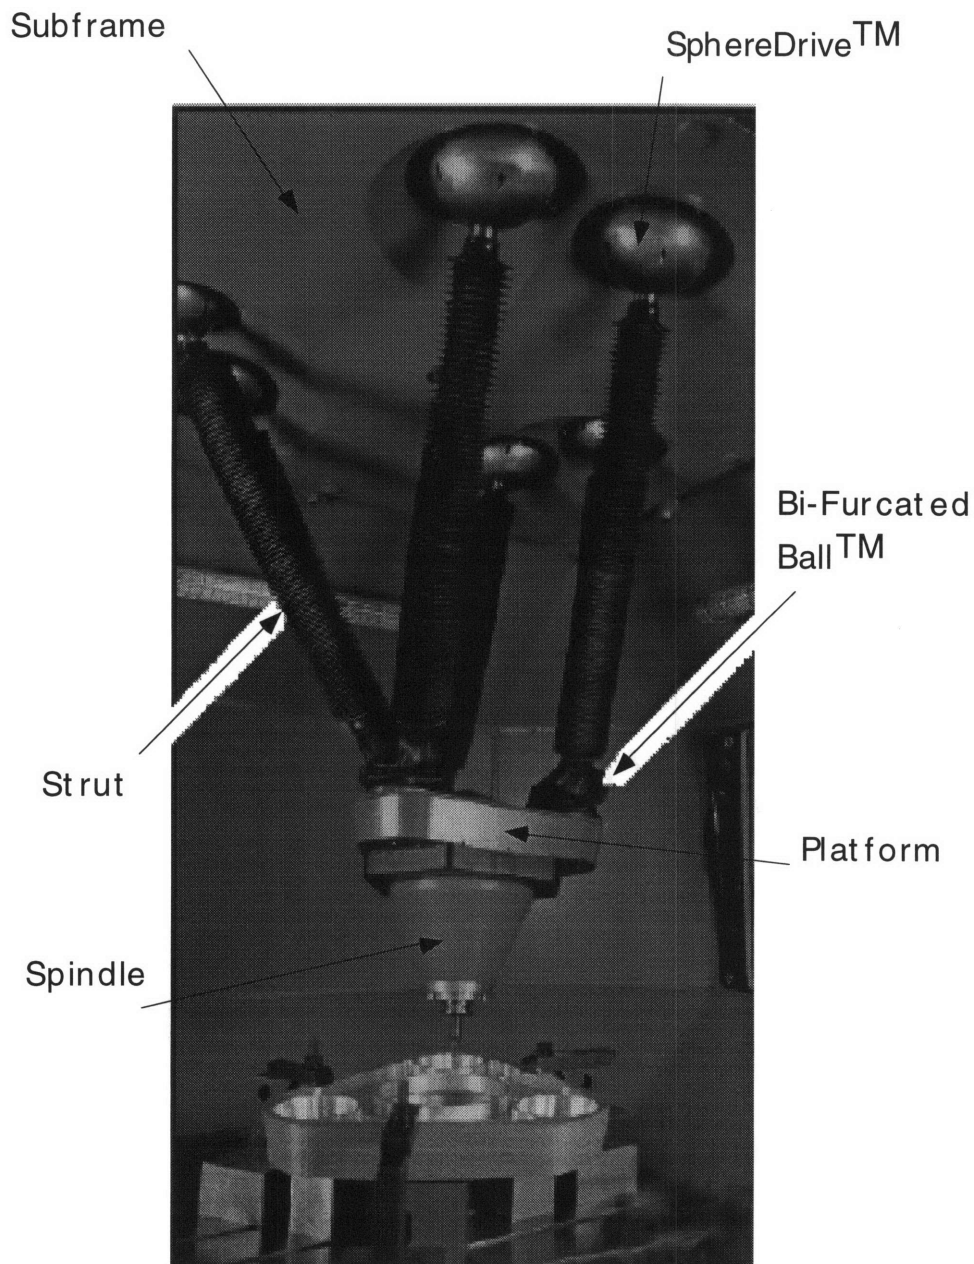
MIT Hexel Hexapod Five Axis Milling Machine
